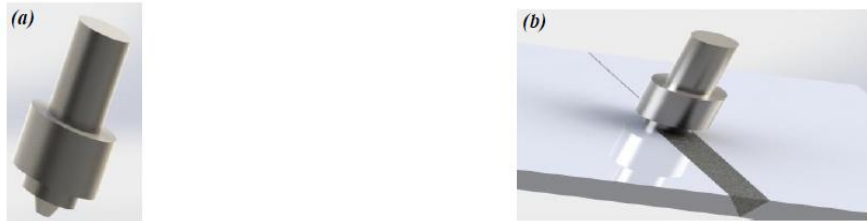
(a) The welding tool geometry and (b) Schematic diagram of the FSW process.
